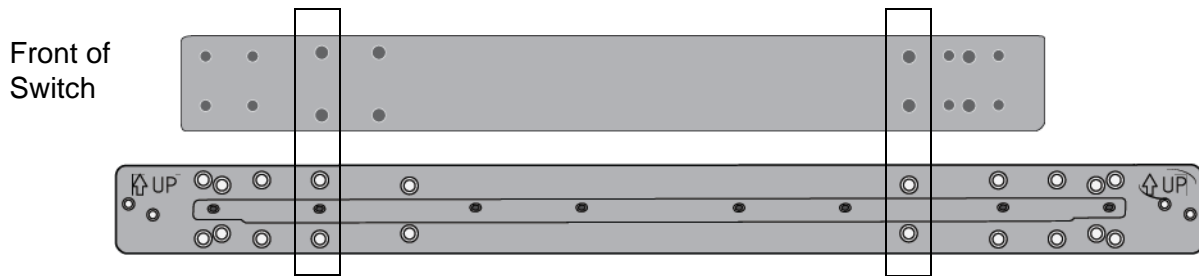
Inner Rail Screw Holes for the x530DP-28GHXm Switch
